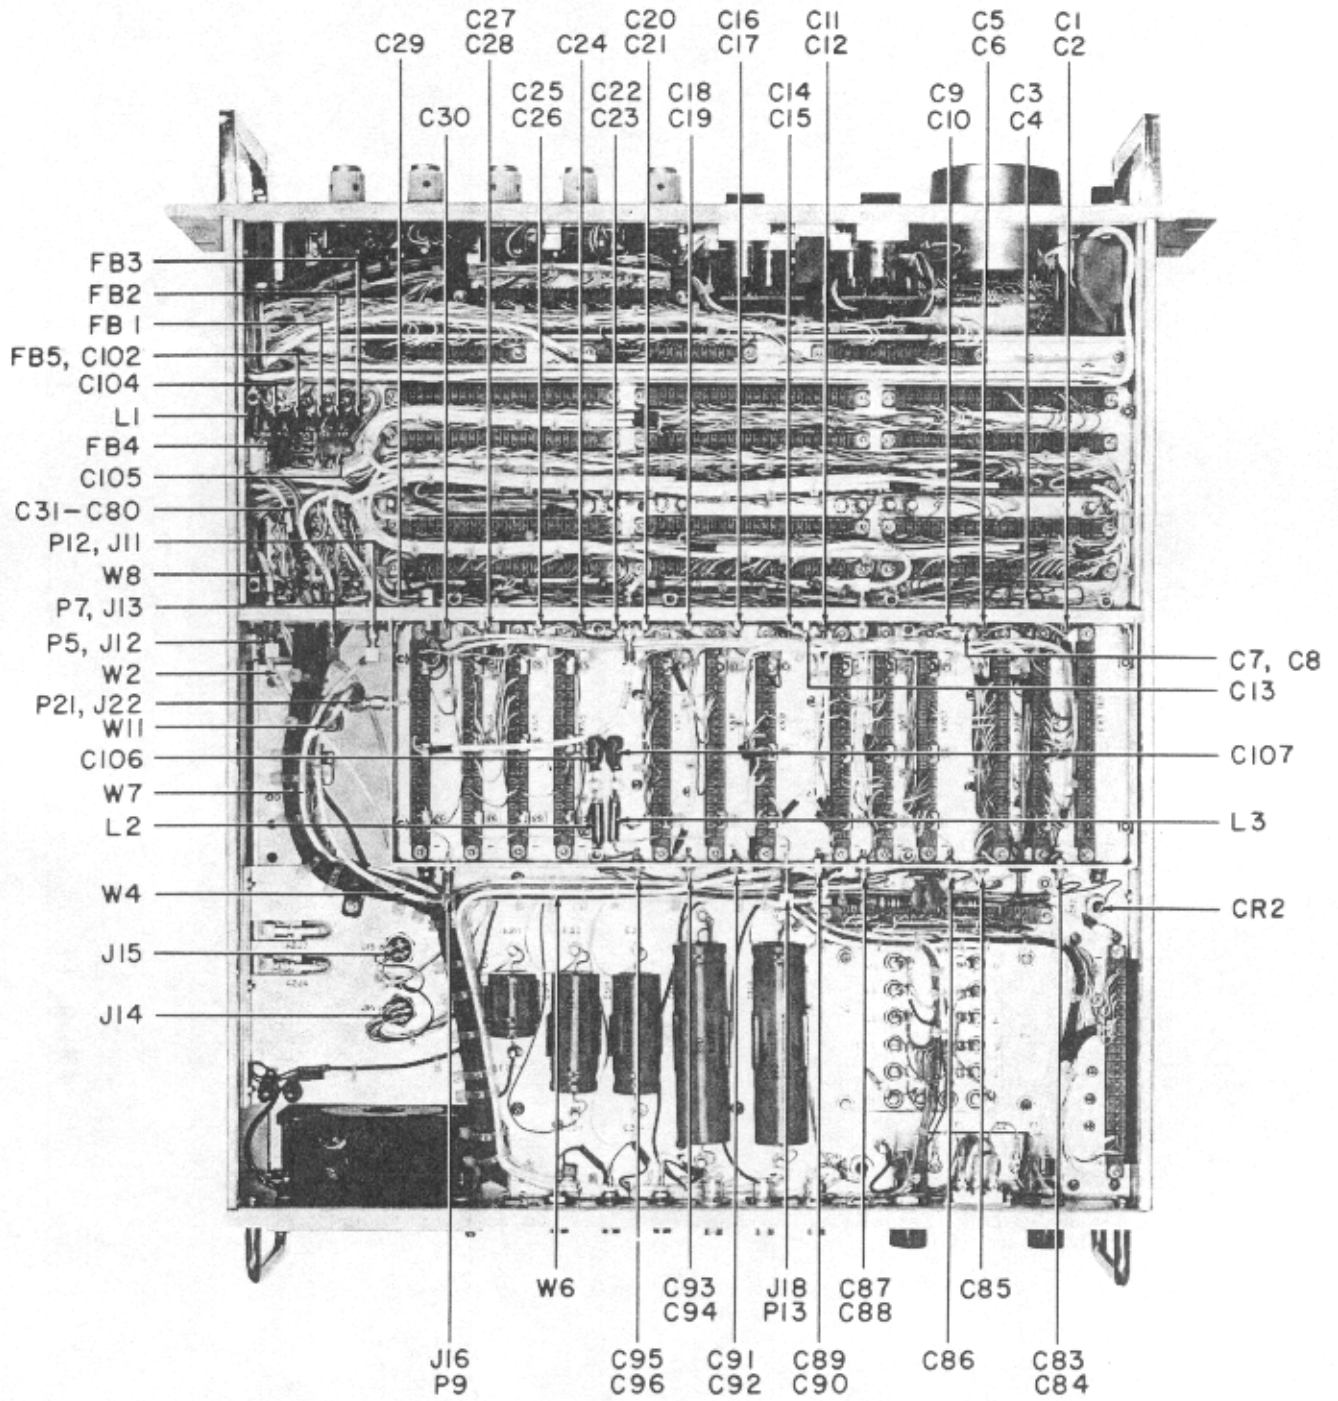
Type WJ-8888 Receiver, Bottom View, Location of Components
